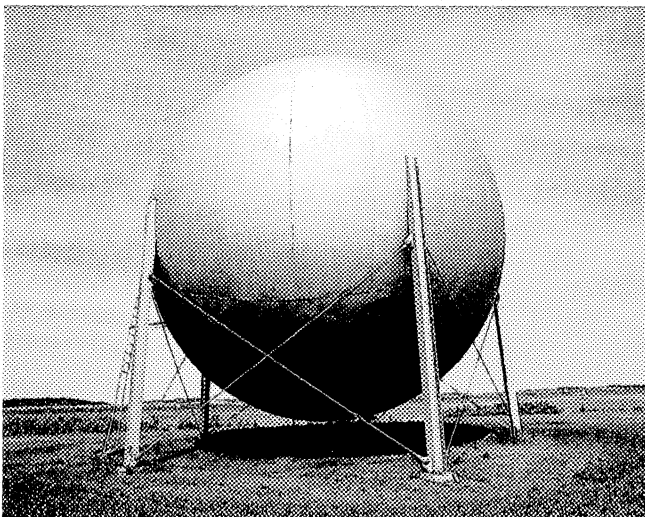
Vessel Constructed of Welded Gore Sections
